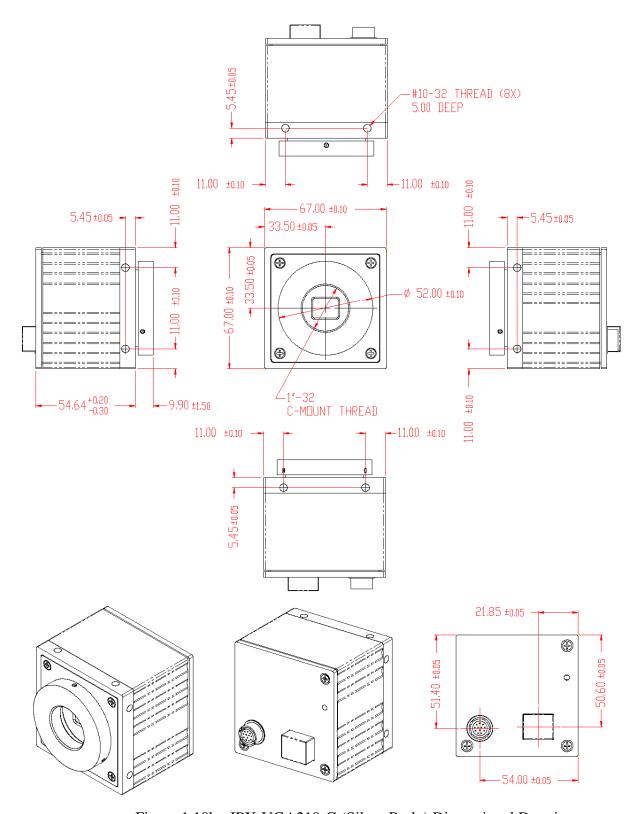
IPX-VGA210-G (Silver Body) Dimensional Drawings
